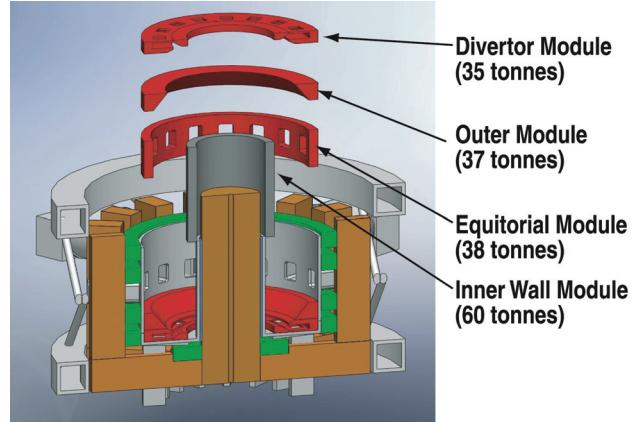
Toroidally continuous ring version of machine. TF coil upper sections are already removed.
